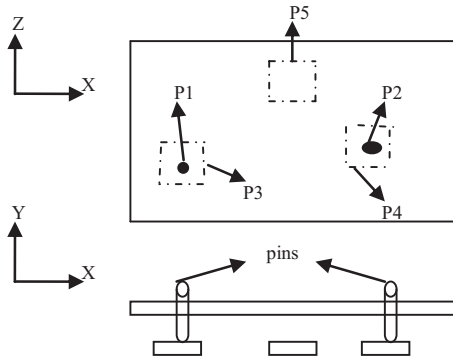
Top and side views of 3-2-1 fixture layouts.
